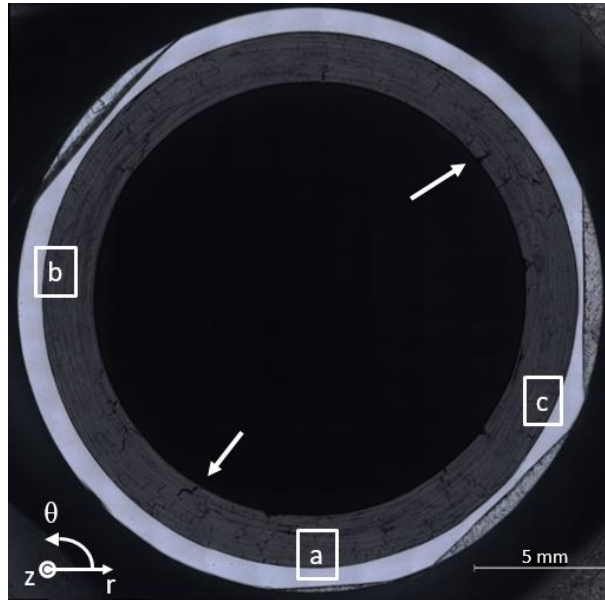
Cross section macrograph of specimen G17. The arrows indicate the location of the cracks formed.
